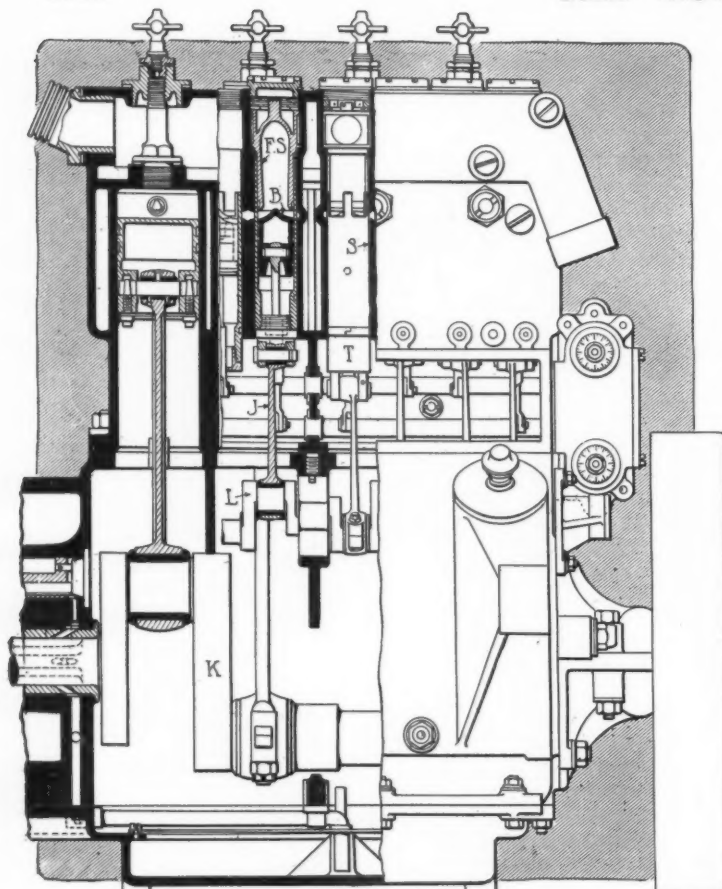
Side section through 4-cylinder Rockefeller sleeve valve motor, showing intake and exhaust sleeves for No. 2 cylinder, one sleeve in section, the other in elevation
